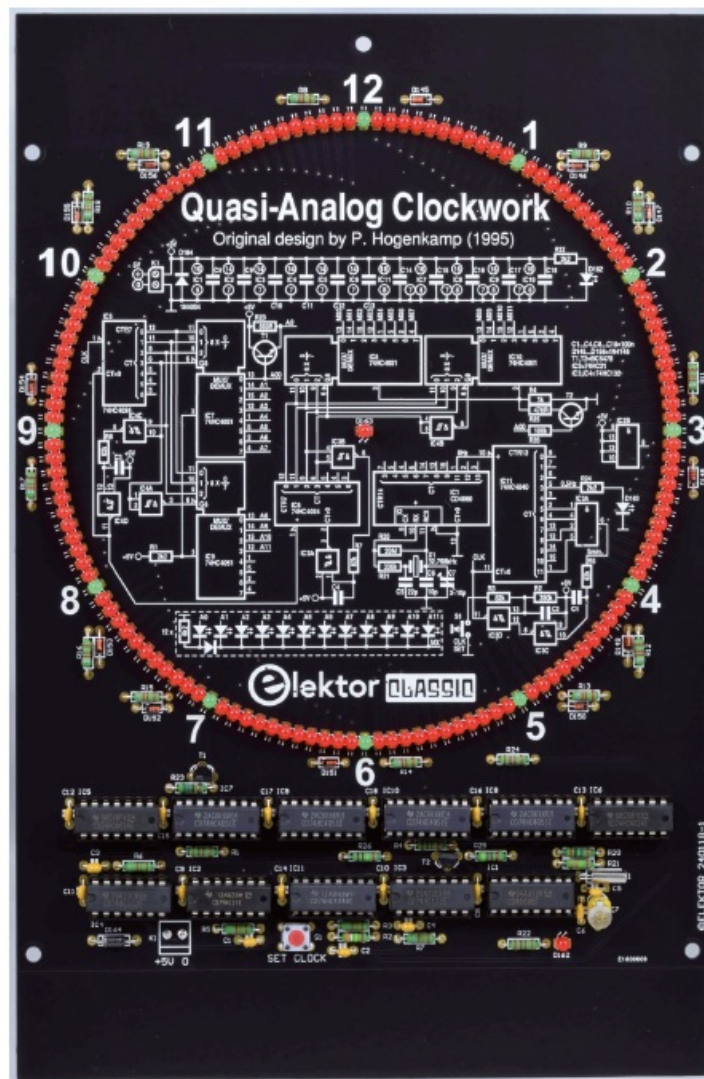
Front view on PCB 240118-1 v1.1. All parts are fitted and soldered.
